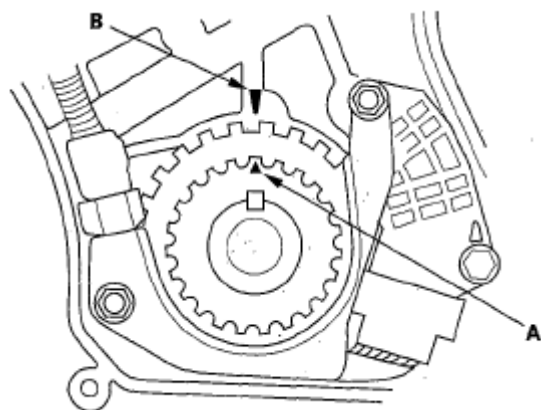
Identifying TDC Mark On Tooth Of Timing Belt Drive Pulley With Oil Pump
